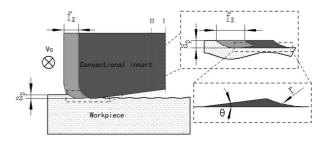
Geometric principle of the conventional insert of the milling cutter[5]
